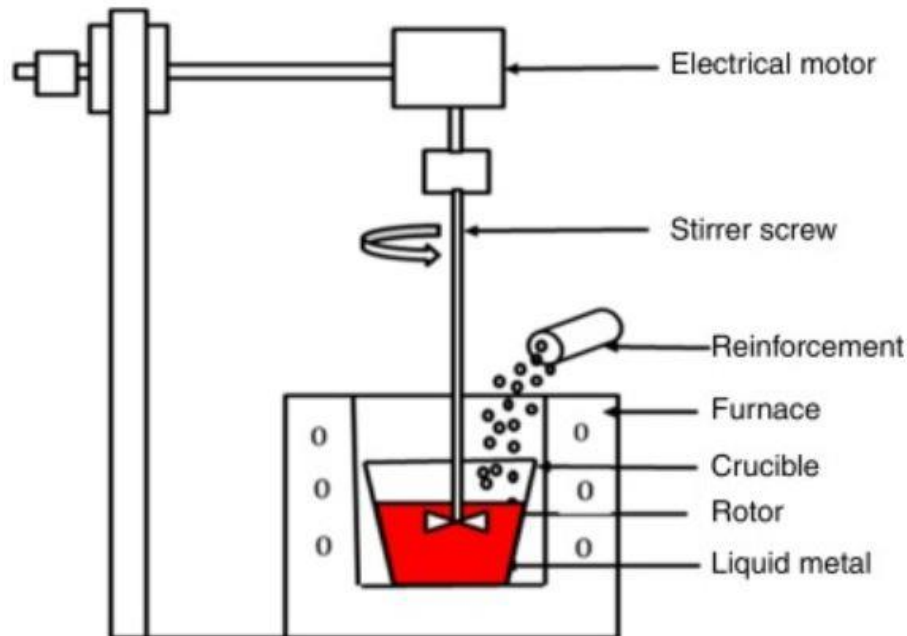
Stir Casting Technique for Fabrication MMCs.
